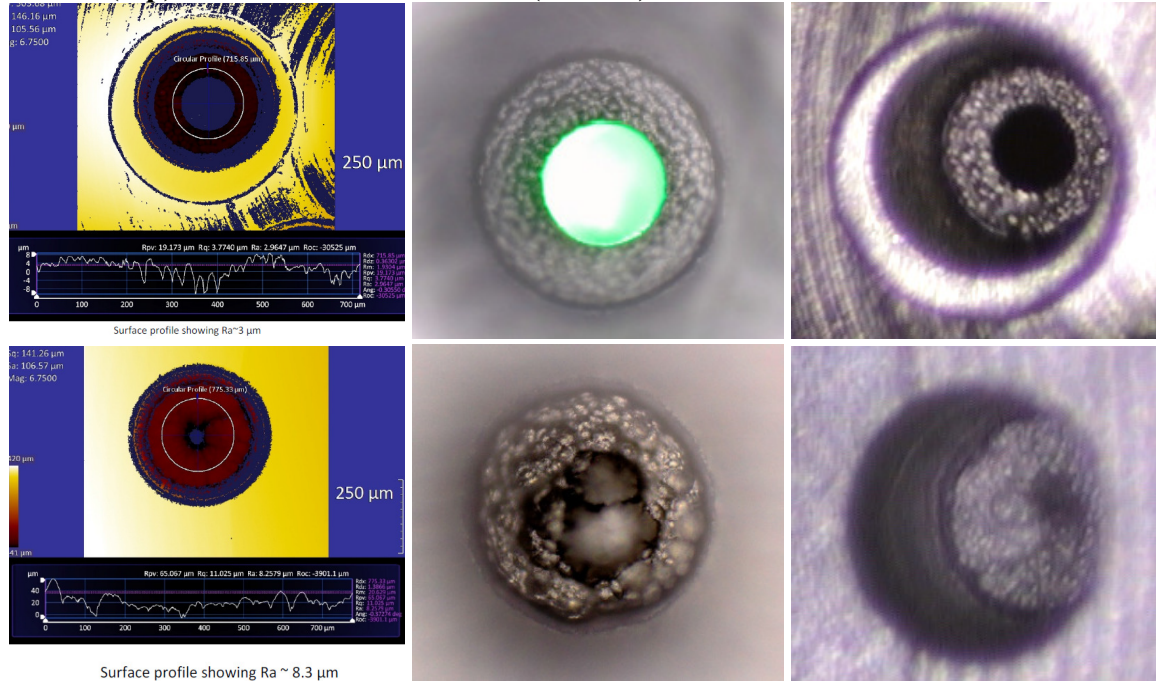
3D Laser Drilling of C'Bore in Machined Fuel Injector Nozzle Seat Blank – 420 SS (top) & Heat Treated 440A SS (bottom)
